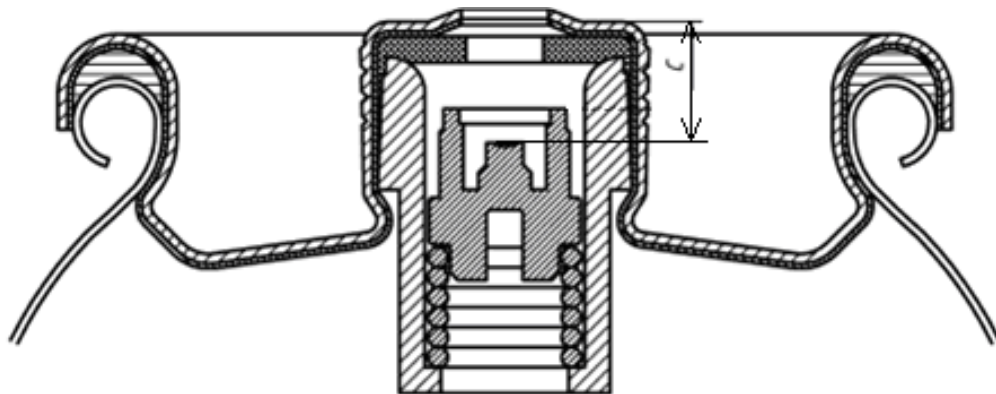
Section of a threaded centre boss valve cup (type 1)
